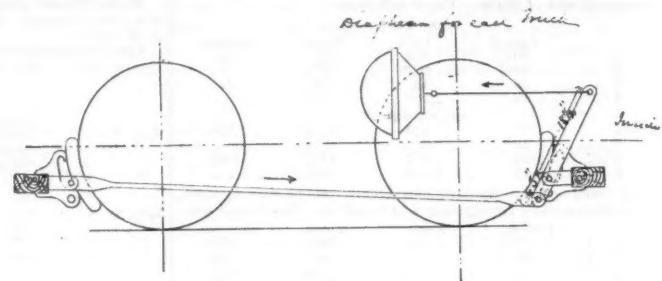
Eames Vacuum Brake, Indianapolis, Decatur & Springfield Cars.
